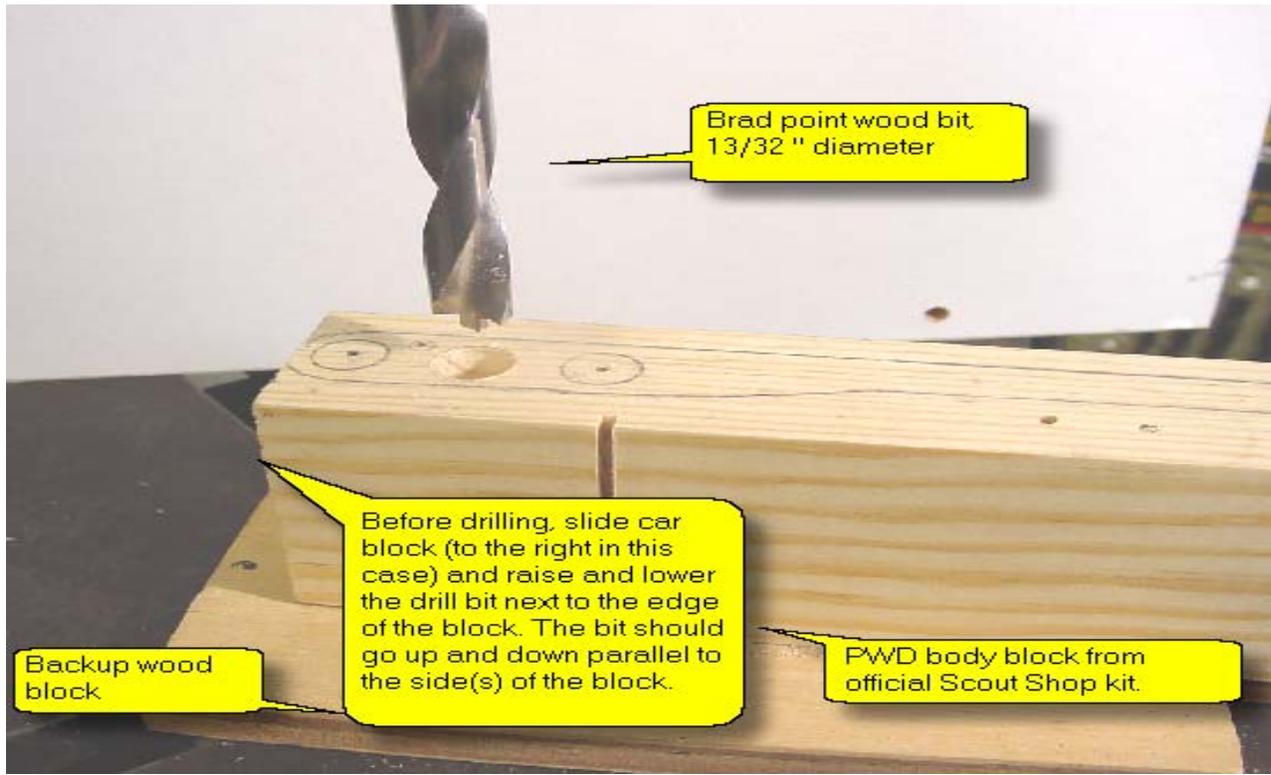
Checking if the axle hole is perpendicular to the body sides.
